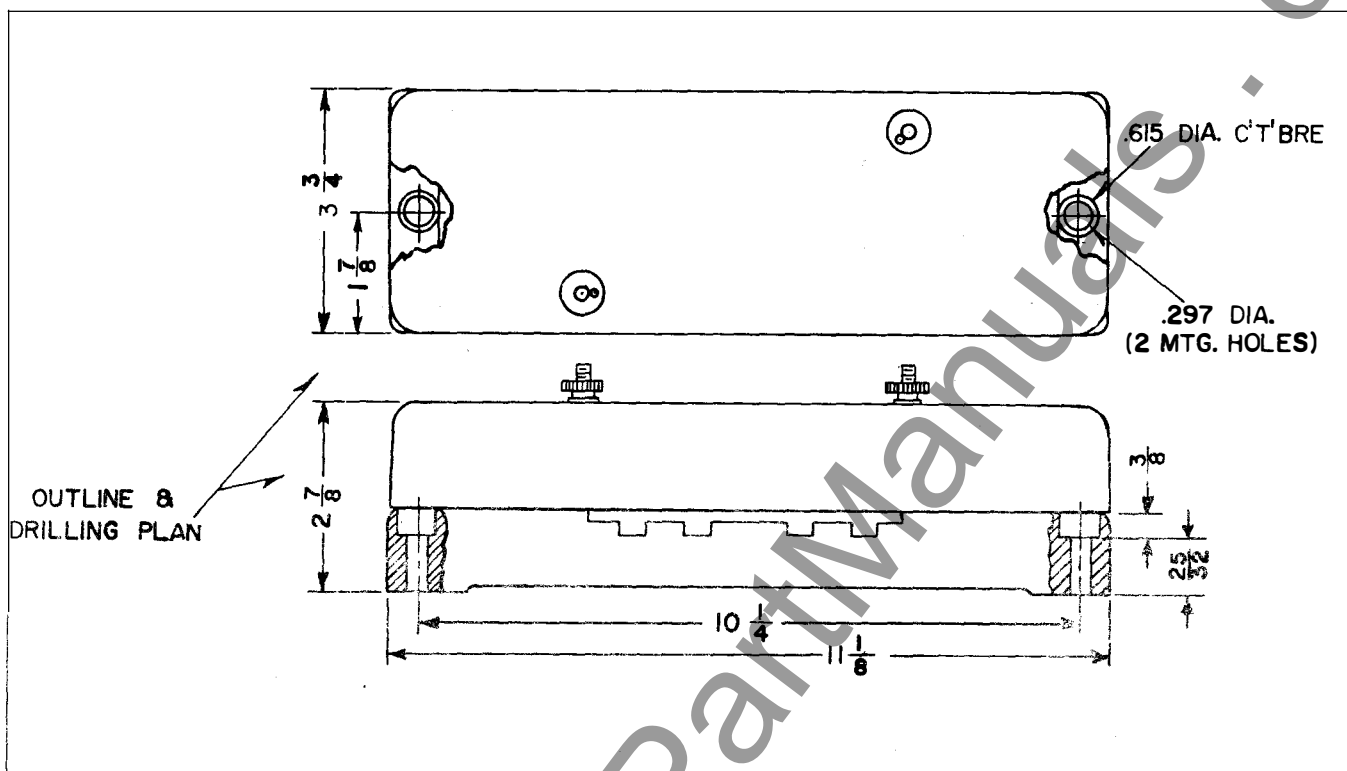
Types PS-2, -7, -8 Phase-Shifting Transformer
